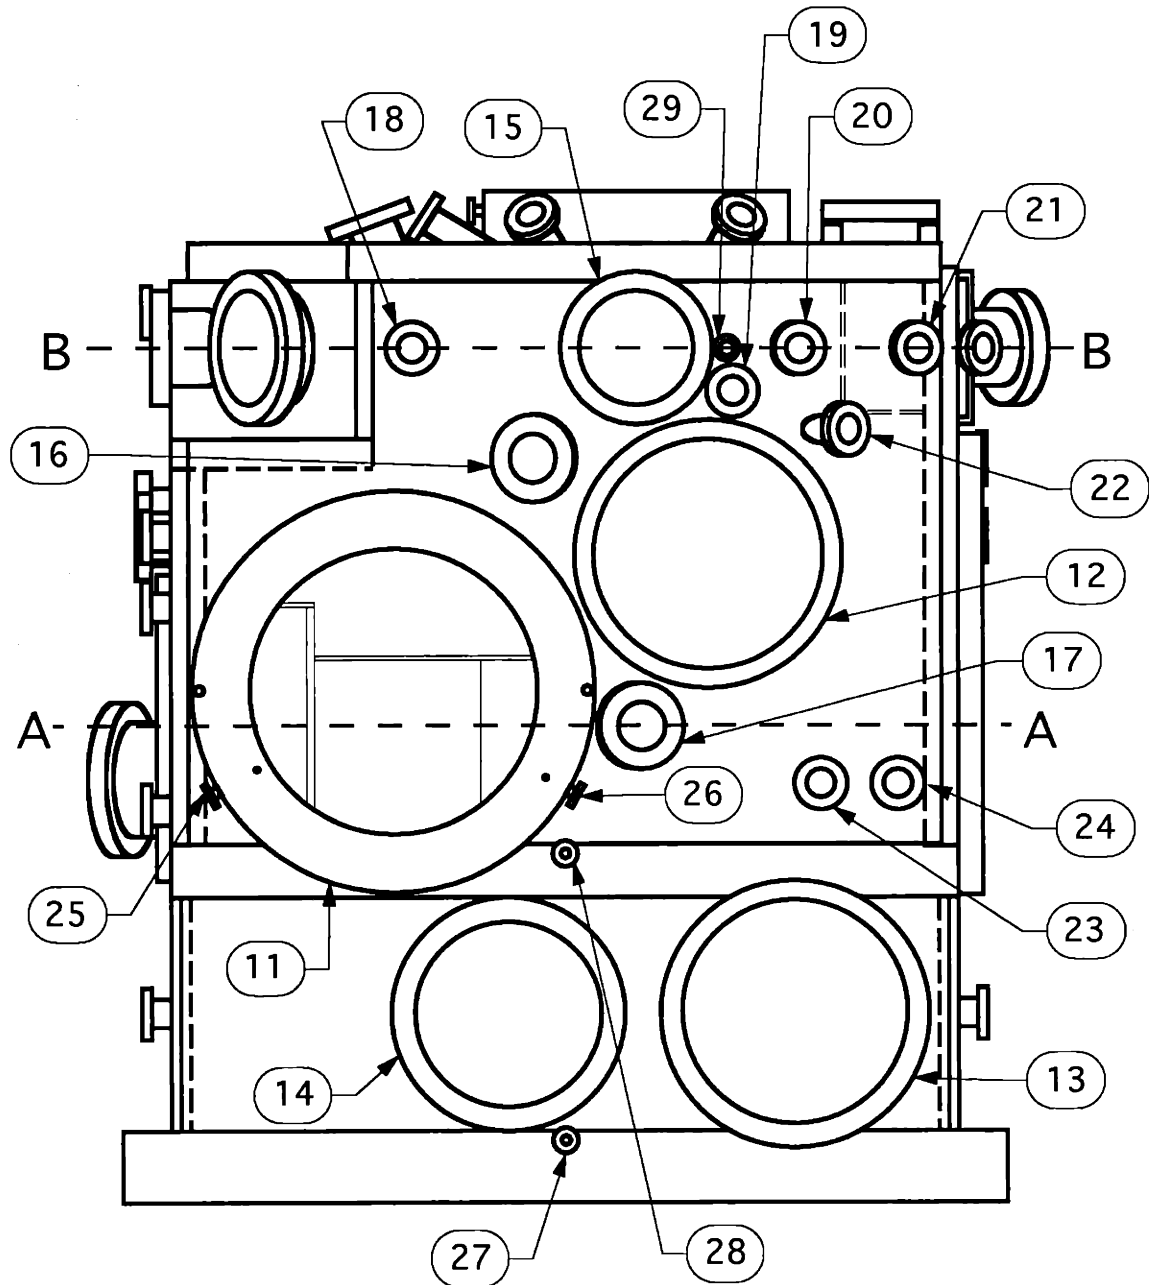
External layout of the Front side of the primary welded assembly. Dashed lines A-A and B-B indicate the beam scattering and surface spectroscopy heights, respectively.
